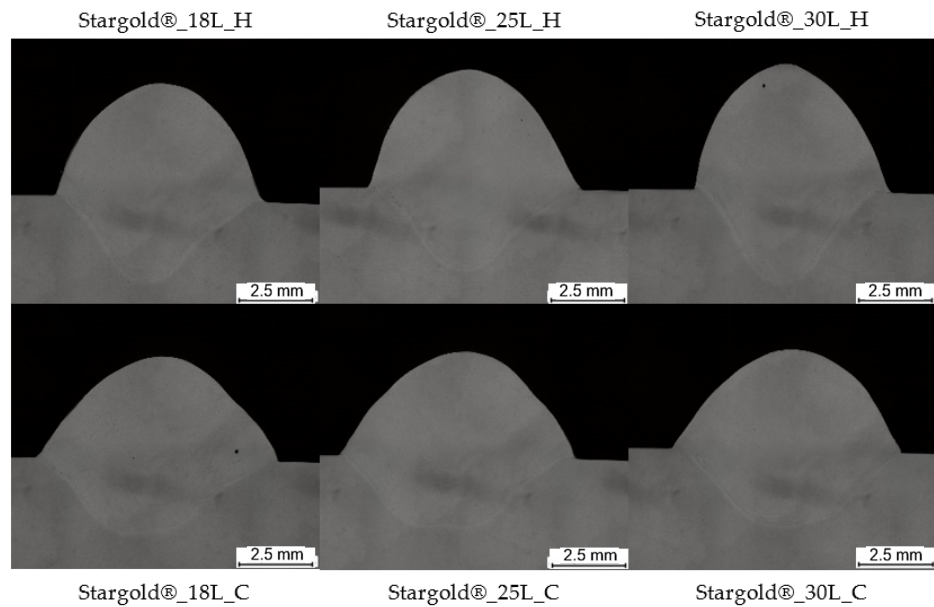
Cross-sections of single weld beads with CMT and Stargold® shielding gas.
